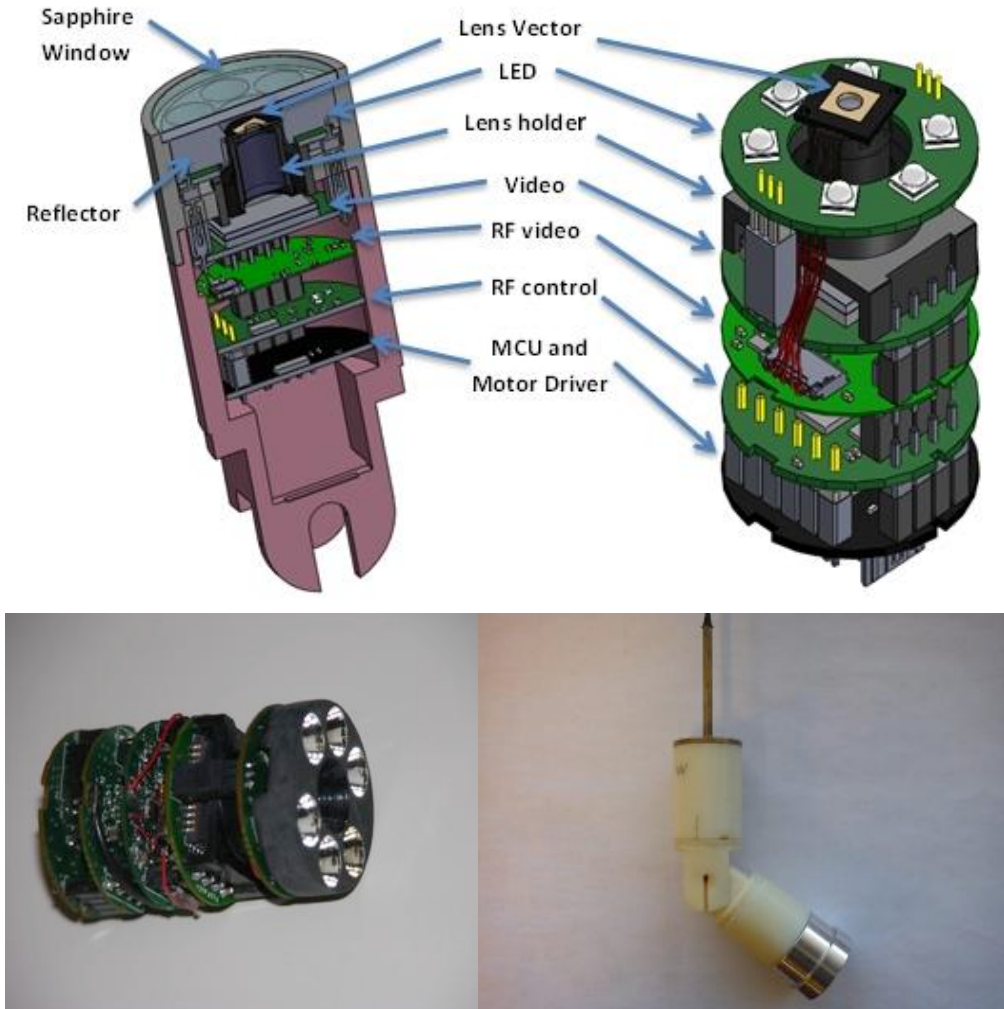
Top: CAD PCB description. Bottom left: MARVEL CM PCB research platform electronics stack. Bottom right: Assembled tilt cylinder.
